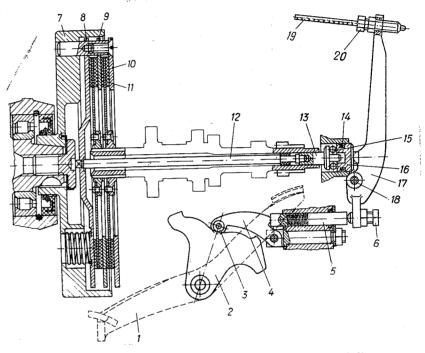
Clutch and clutch release mechanism in gear shifting:
